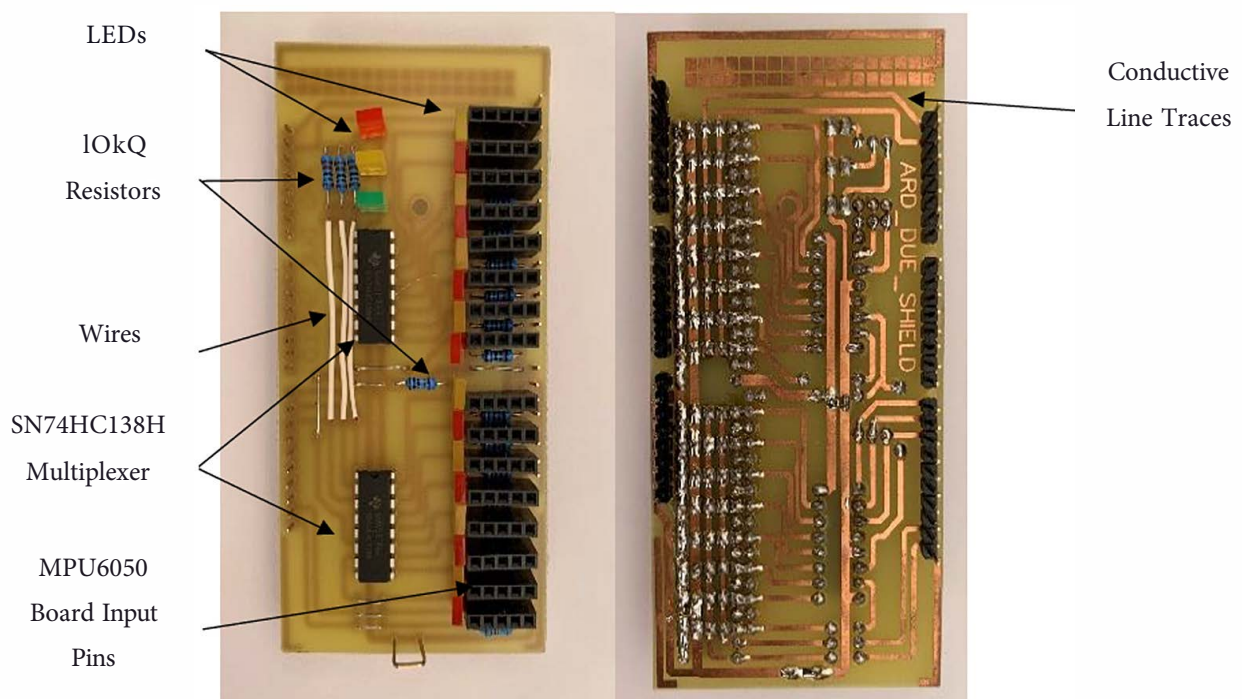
Design of final PCB Board: Top View (Left) & Bottom View (Right)
